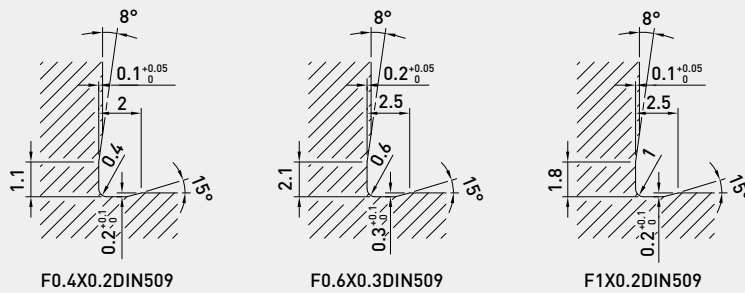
Suggested chamfer dimension per DIN 509 for the "A" dimension in Fig 4.10
